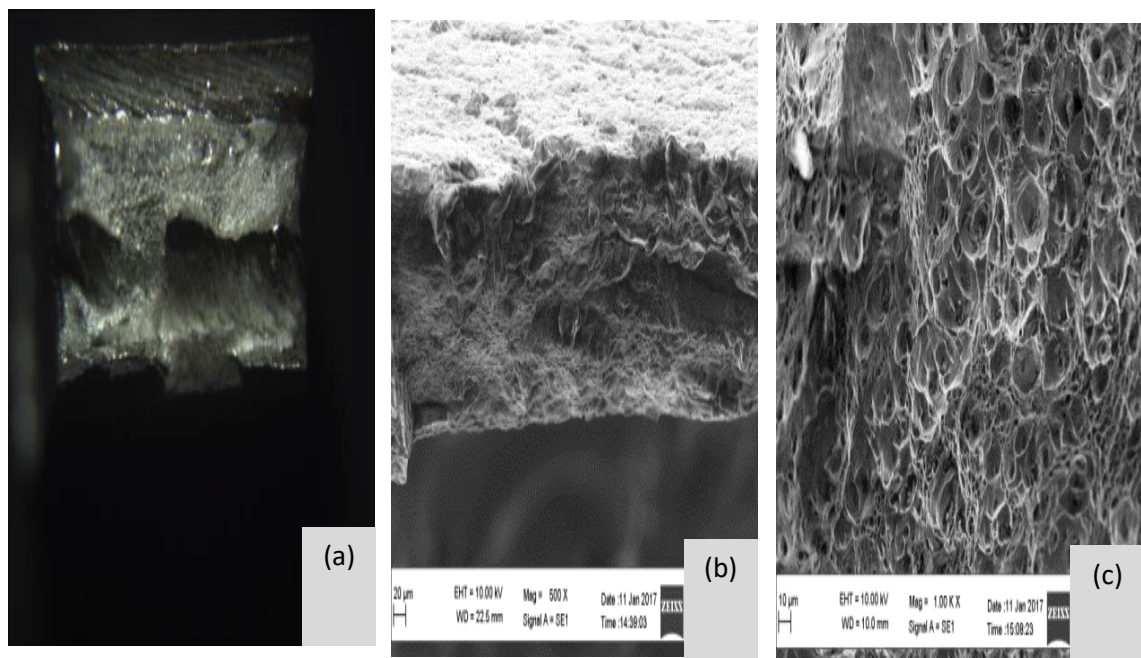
Fracture surface of FSW nugget at 710 rpm, 40 mm/min ,TPH =3.0 mm (a) macrograph of fracture surface; (b) SEM image of fracture surface; (c) enlarged SEM image of (b).
